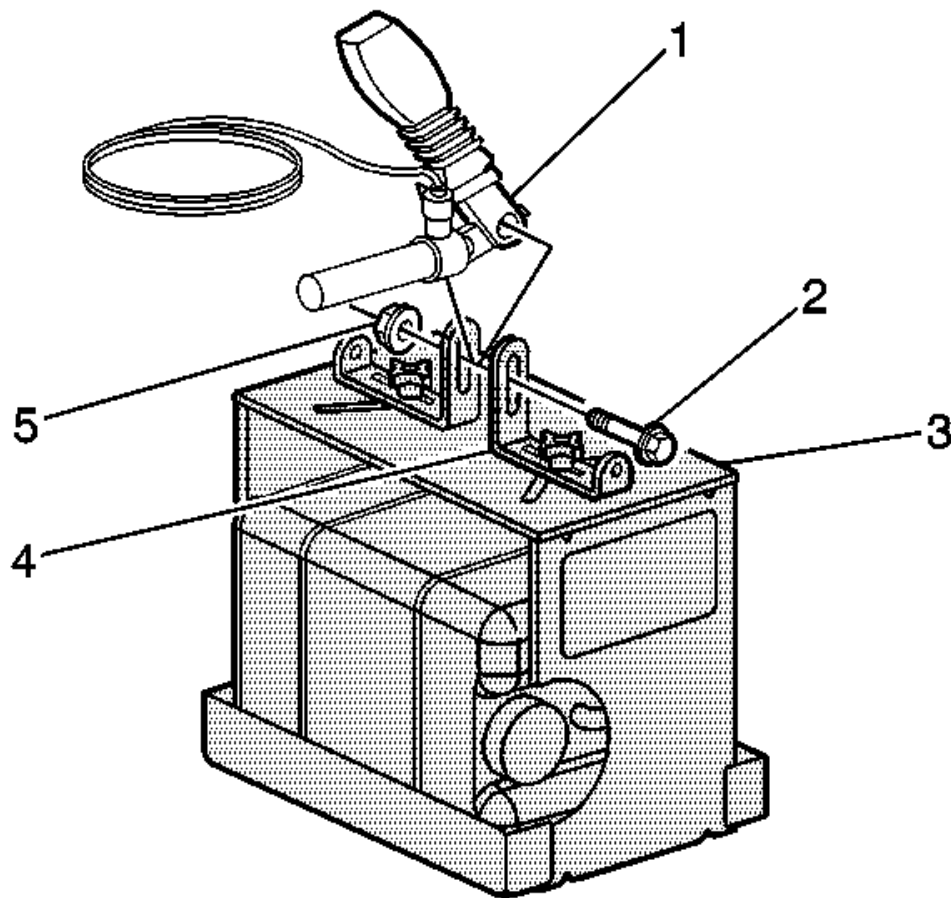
Mounting Pretensioner In SIR Deployment Fixture
